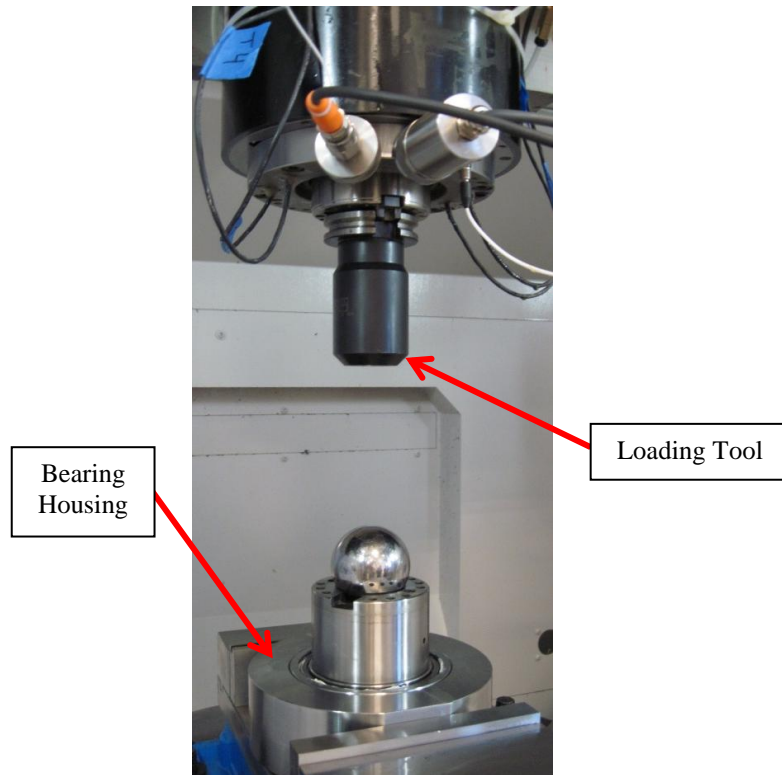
Loading Fixture Clamped into the Machine's Vice.
